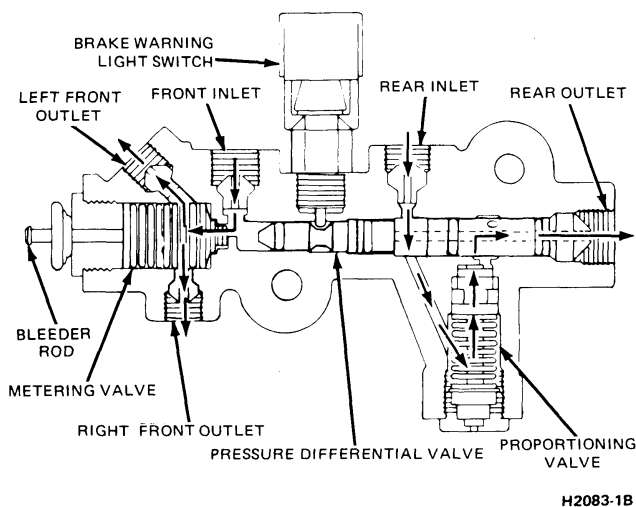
Pressure Differential, Metering and Proportioning Valve—F-100-150, F-250, (up to 6900 GVWR) (4 x 2) F-150—F-250 (4 x 4), Bronco, E-100, E-150 Disc Brakes—Sliding Caliper
